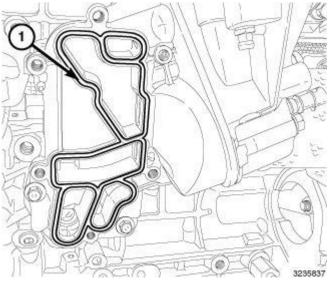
Oil Cooler Adapter O-Ring Seal Courtesy of CHRYSLER GROUP, LLC
